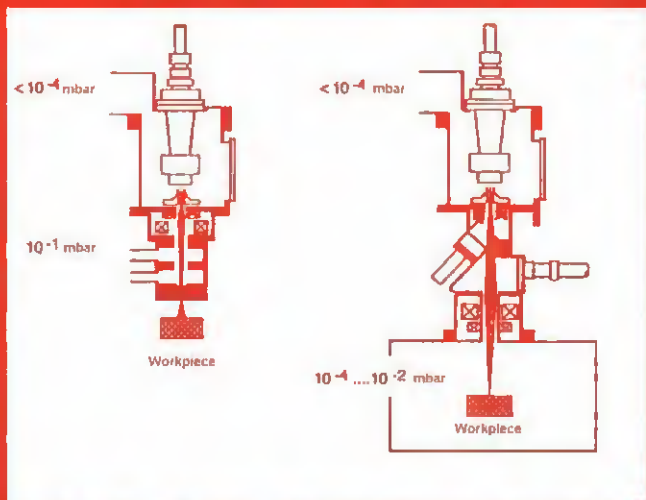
Electron beam welding directly in atmosphere and under vacuum.
